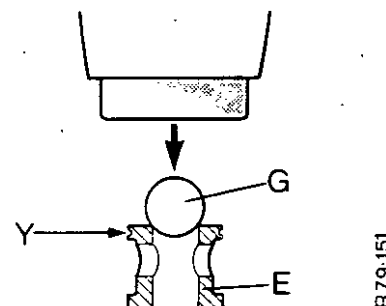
MAKING A SEAL BETWEEN THE SEAT AND THE BALL
